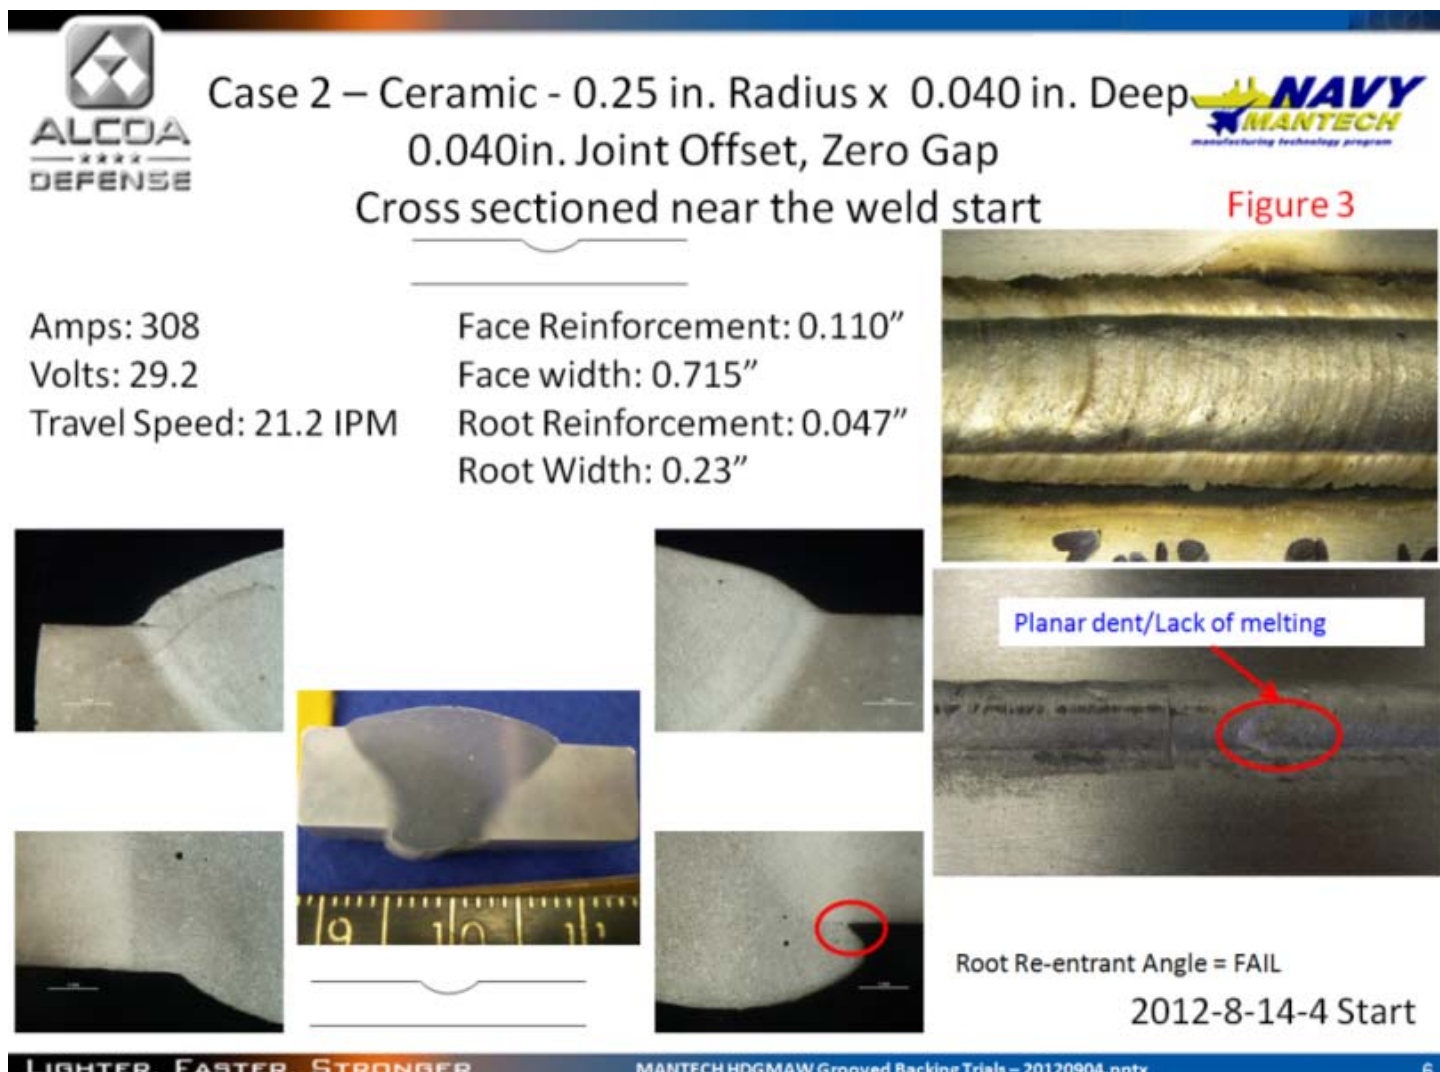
Case 2 – Ceramic – 0.25 in. Radius x 0.040 in. Deep 0.040 in. Joint Offset, Zero Gap Cross sectioned near the weld start
